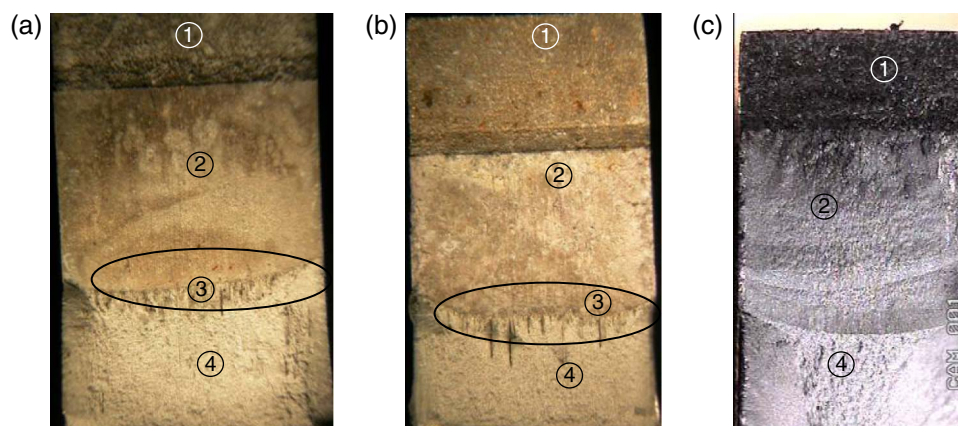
Macroscopic morphology of fracture surface.
